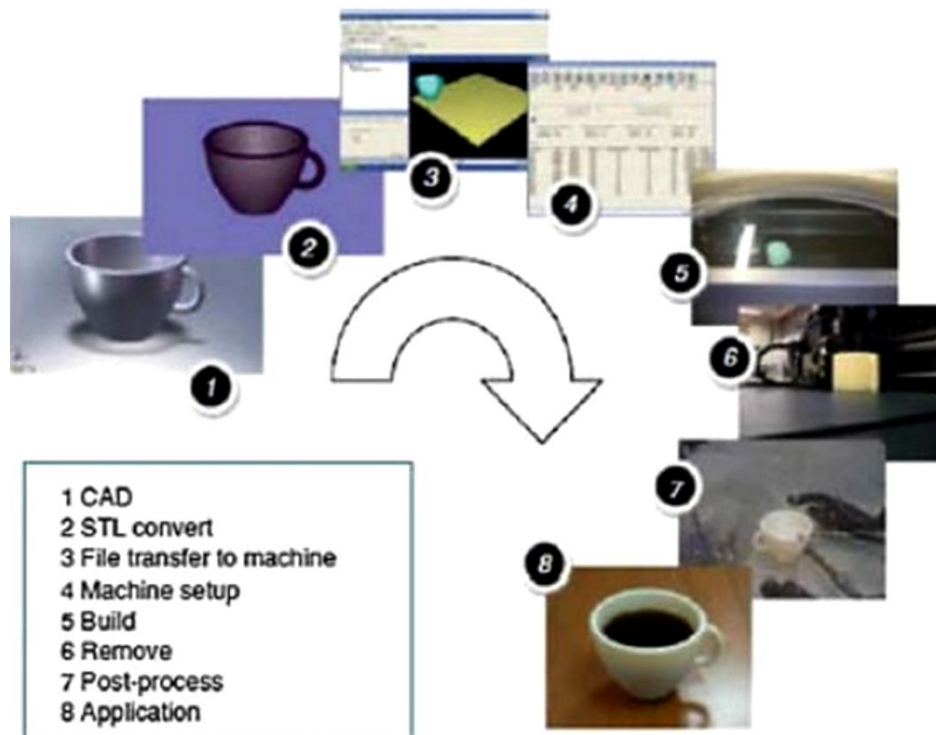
Methodology involved for the Additive Manufacturing Machine.
